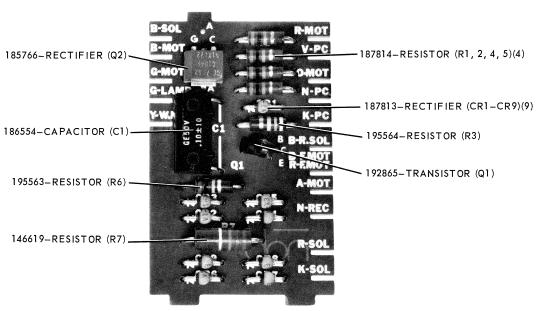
197399-COMPONENT BOARD ASSEMBLY (MODEL 850 H ONLY)
